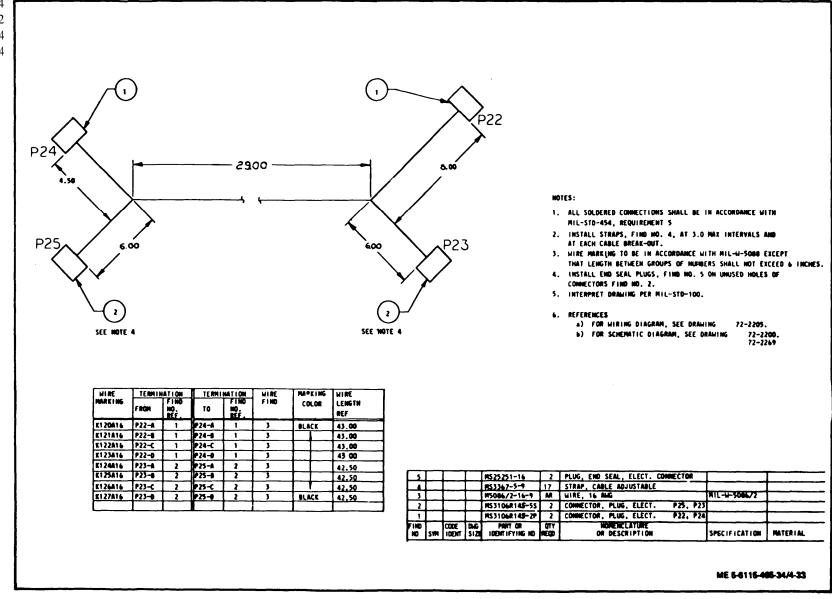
Governor Control Unit to Hydraulic Actuator Unit Wiring Harness, Drawing No. 72-2282
